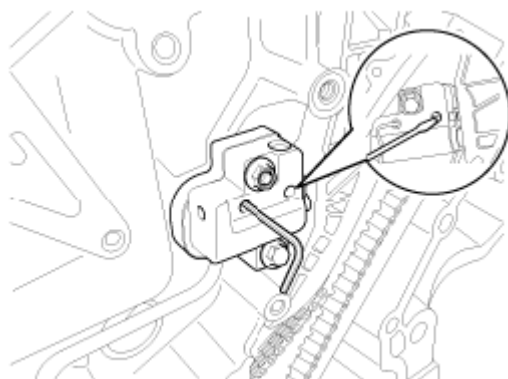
Installing Set Pin After Compressing LH Timing Chain Tensioner
